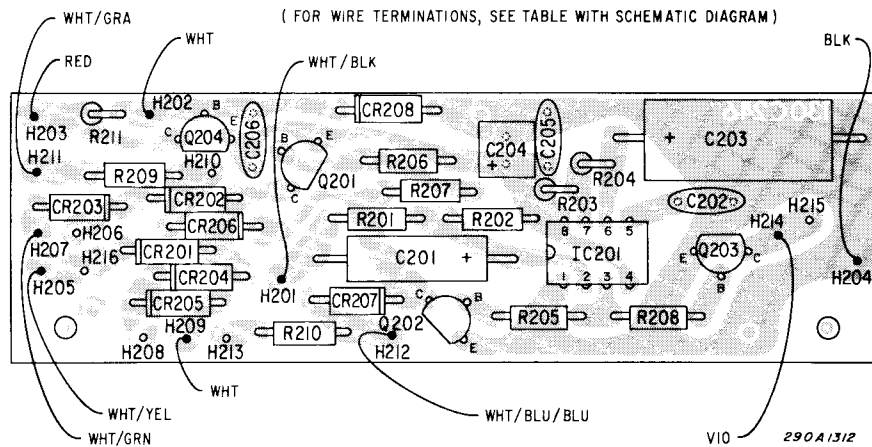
Burglar Alarm Board Parts Location Diagram.
